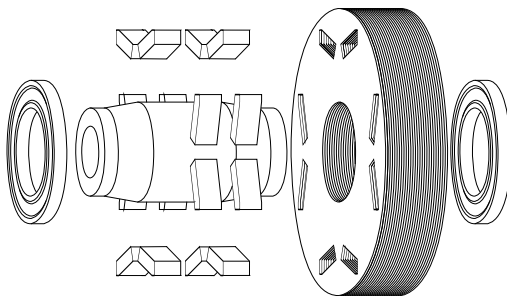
Schematic rotor assembly, consisting of bearings, rotor-shaft, magnets and lamination stack.
